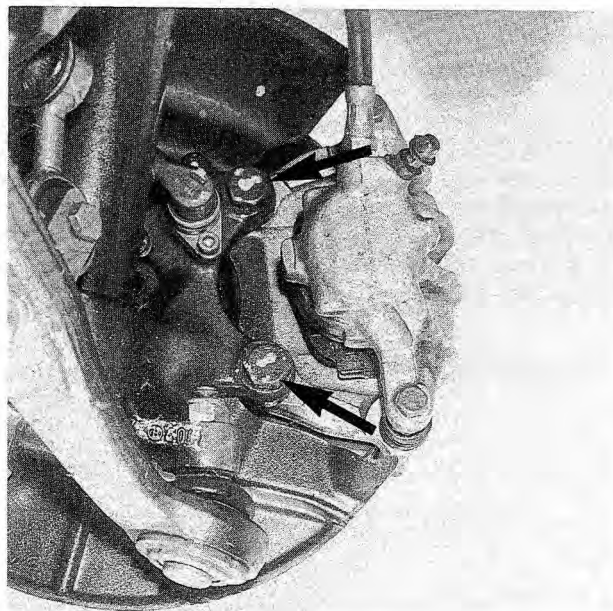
Front brake caliper mounting bolts (arrows).
